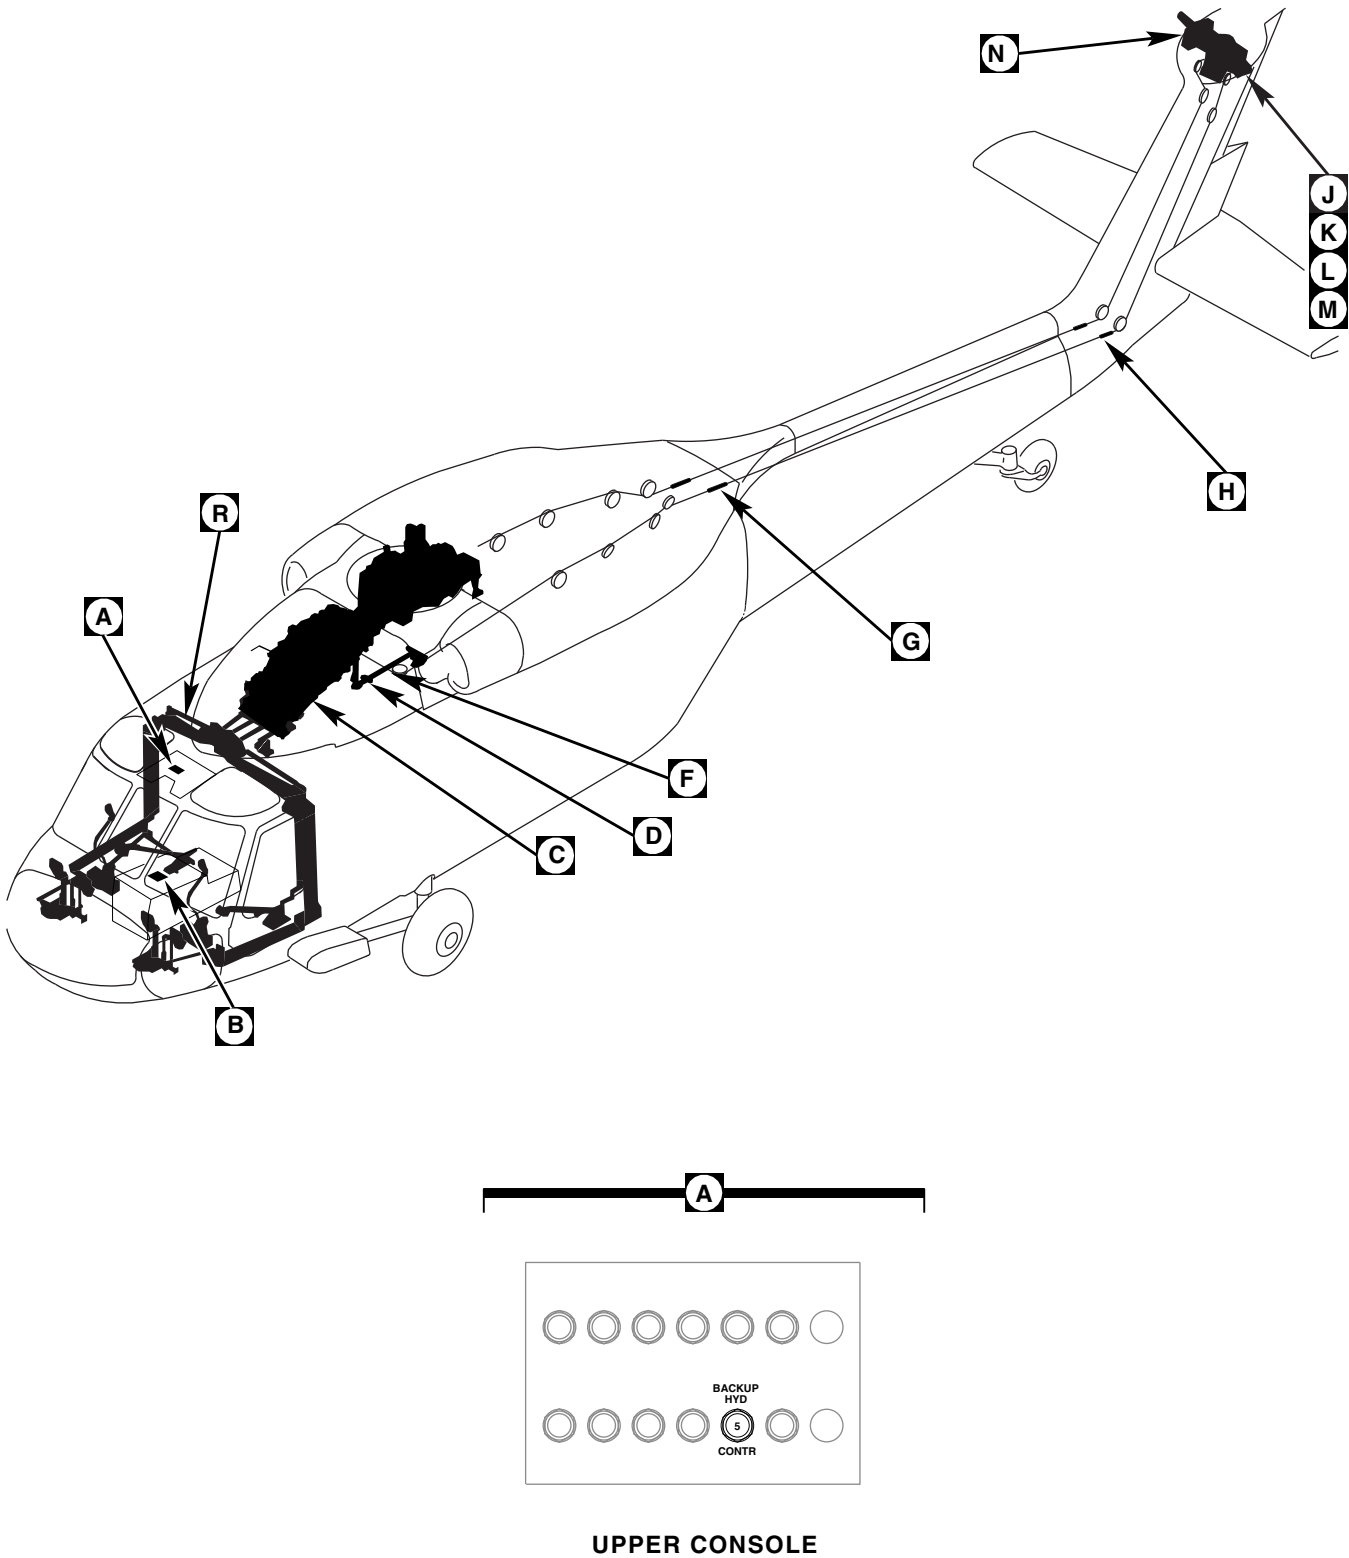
TAIL ROTOR SYSTEM COMPLETE RIG (SHEET 1 OF 7)
